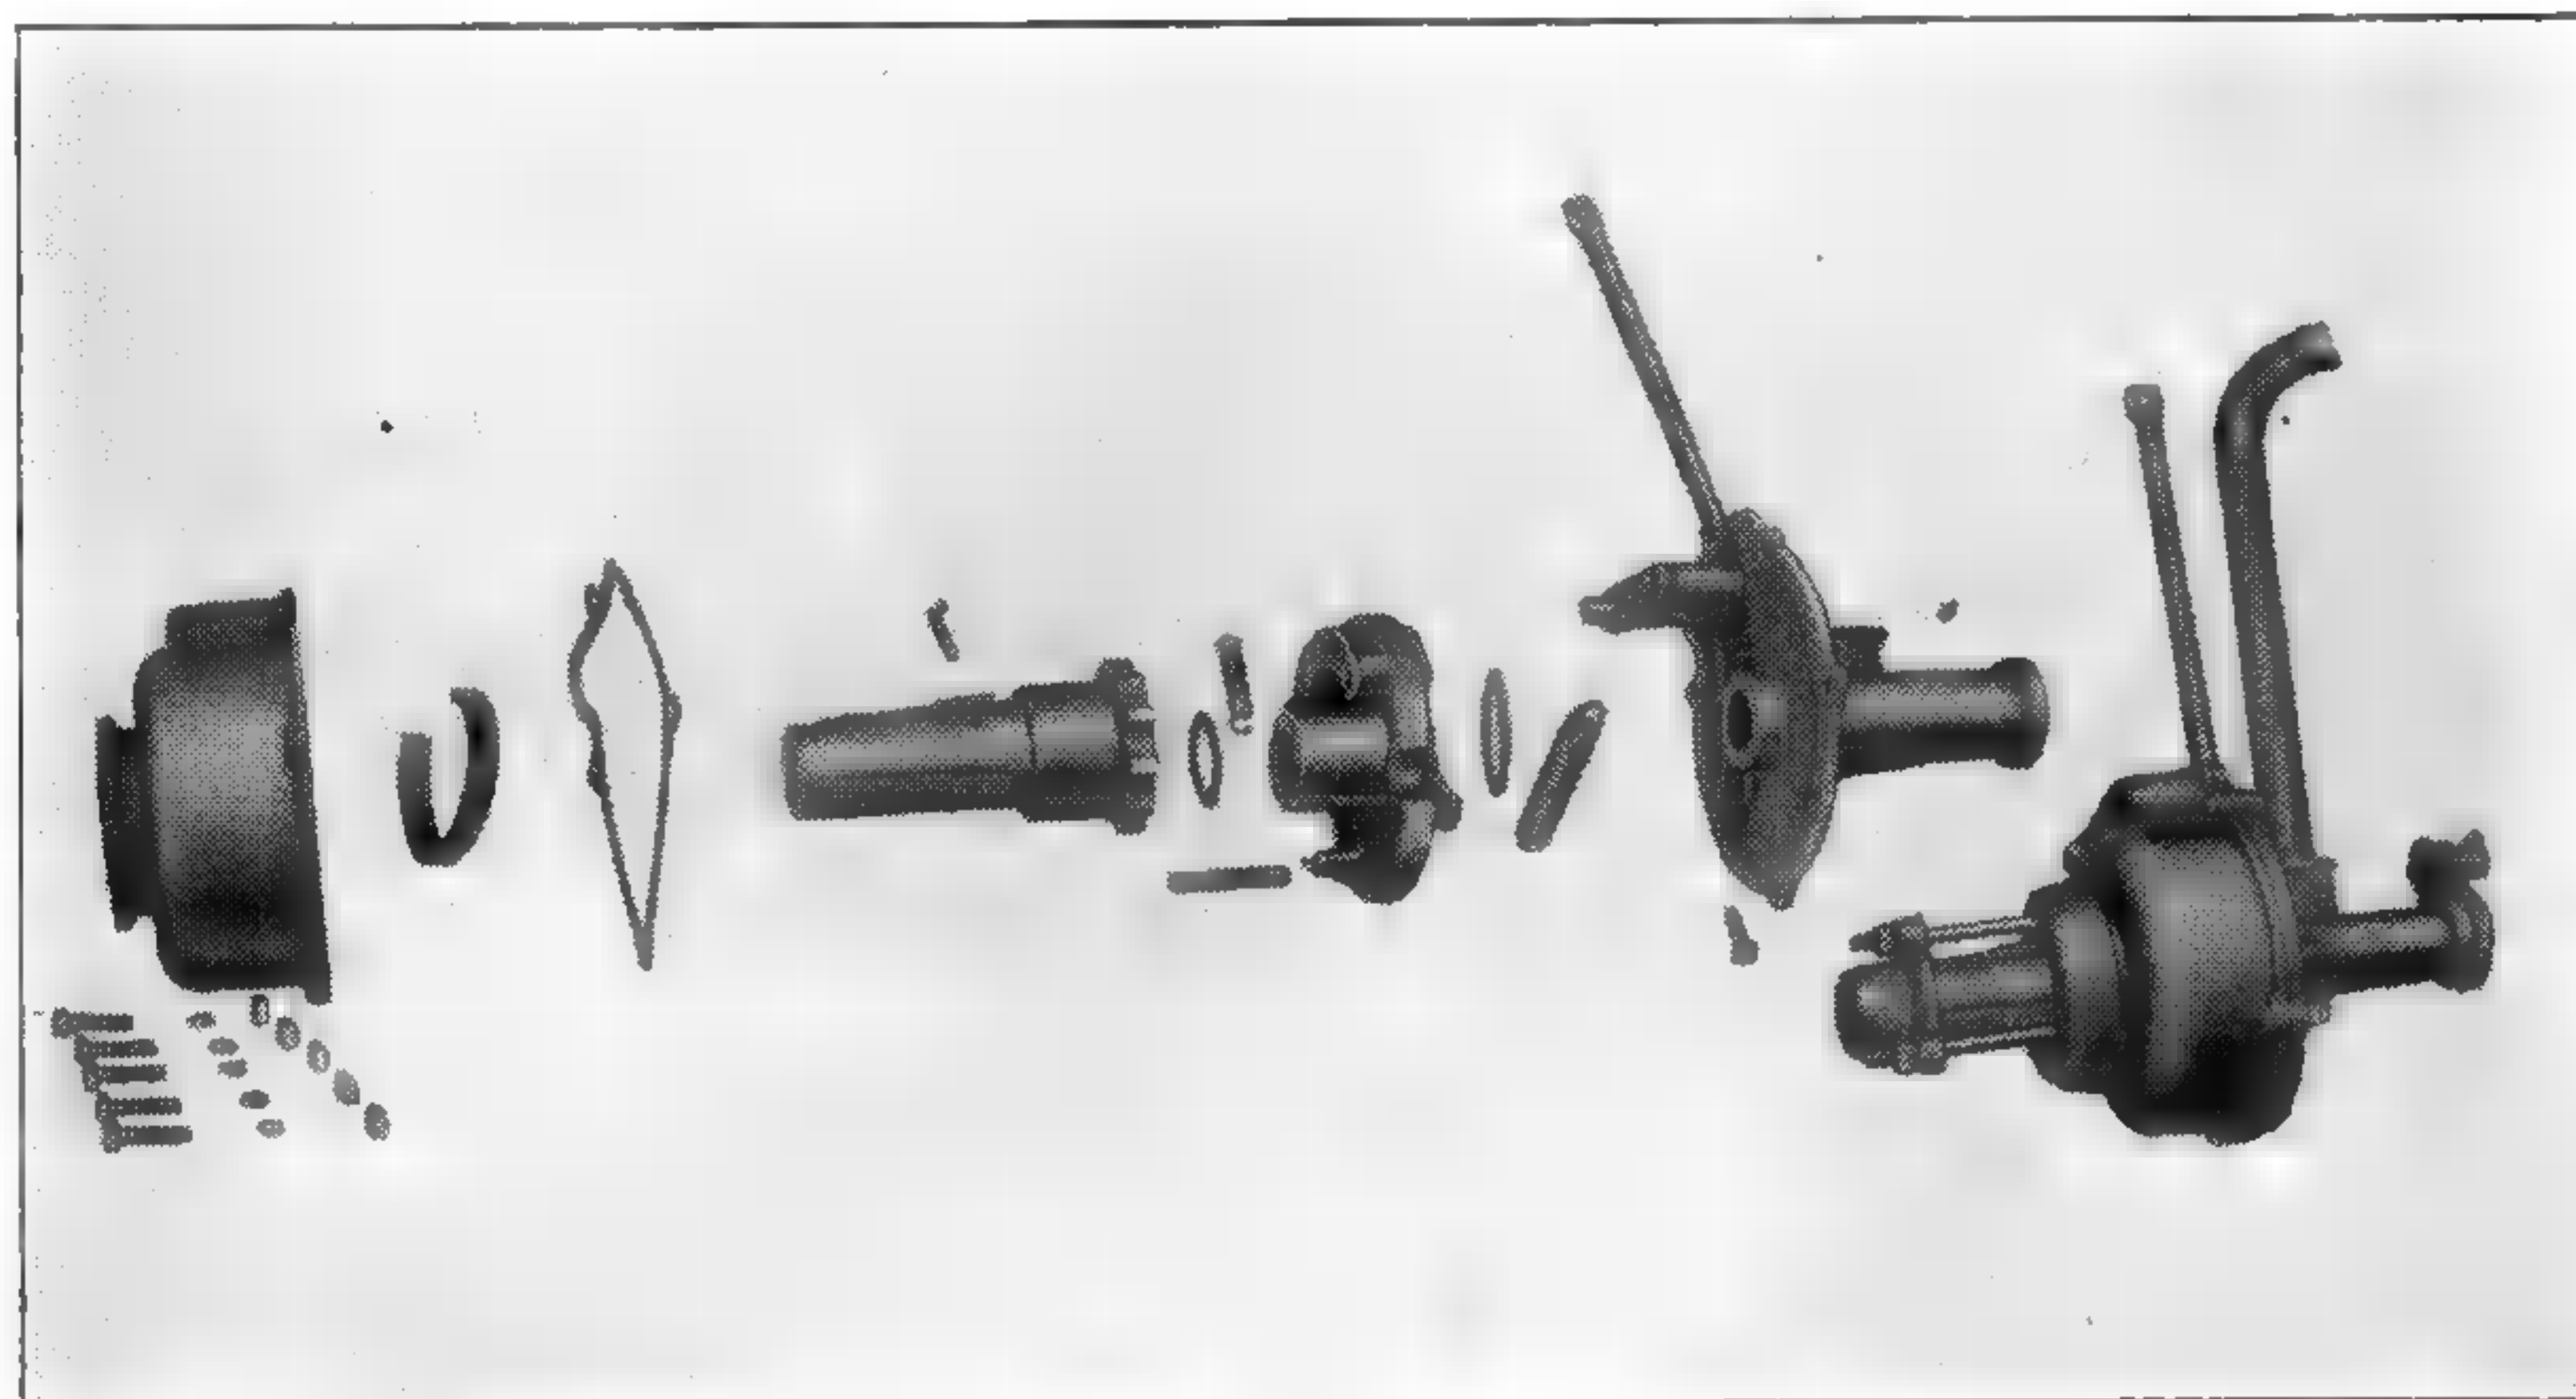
The enclosed power lift is shown completely assembled, right, and “exploded” to show component parts. The entire lift is sealed to exclude dirt and to retain oil. Principal parts shown are: cover, felt strip; gasket; box; lifting clutch; and axle journal assembly.
